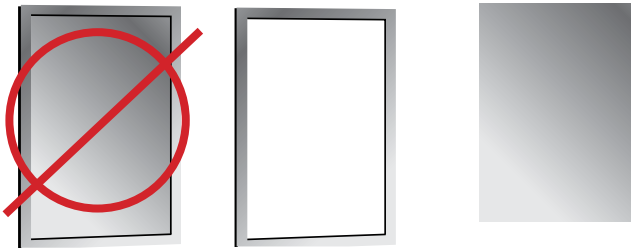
Avoid galvanizing frames containing thinner plates. These parts should be galvanized separately and assembled after galvanizing to minimize the potential for plate warpage and weld cracking galvanizing.
